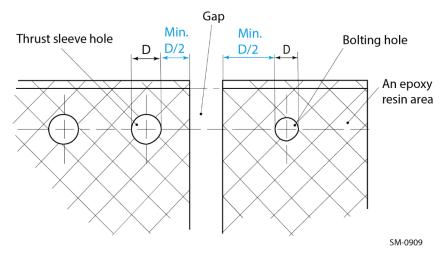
Minimum required distance between a single bolting or thrust sleeve hole and the outer edge of a single epoxy resin area
